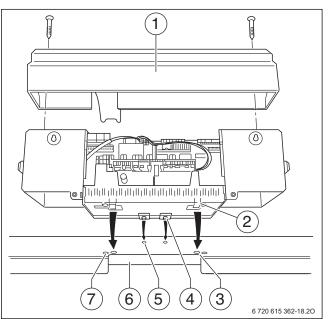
Fitting the control unit for boiler sizes 120 kW to 820 kW
